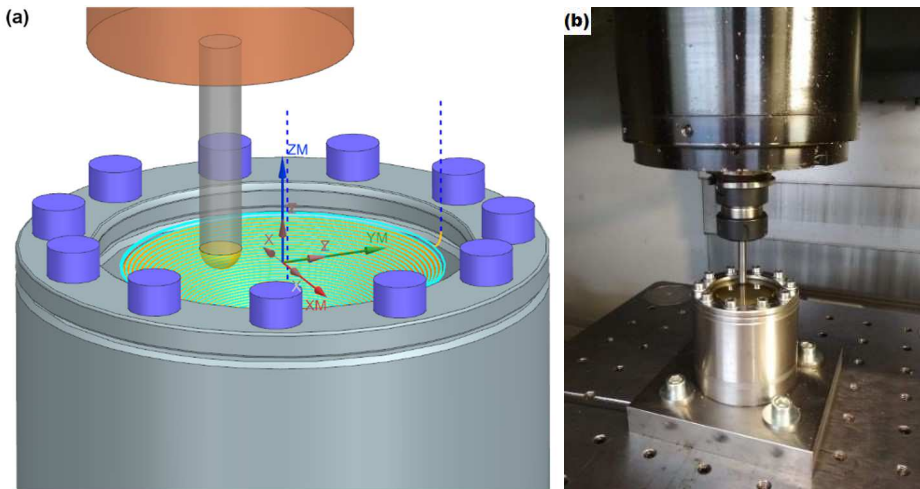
(a) Programmed CNC tool path in NX Siemens CAM, (b) Test stand – Makino PS95 with SPIF dedicated device
